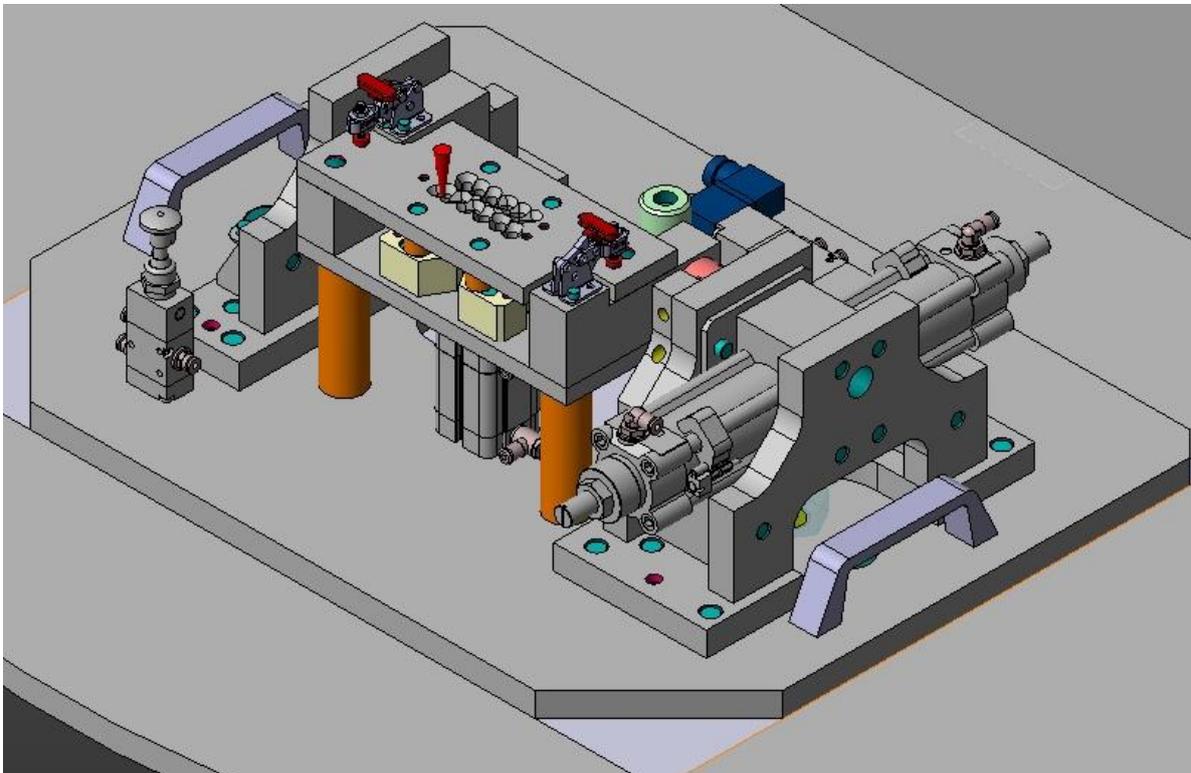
Stage 2 welding mask, final revision [7]
